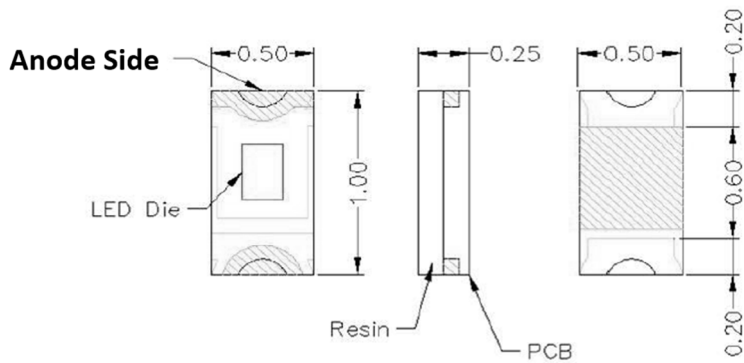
Mechanical drawings of the 1005 package (unit in mm)
